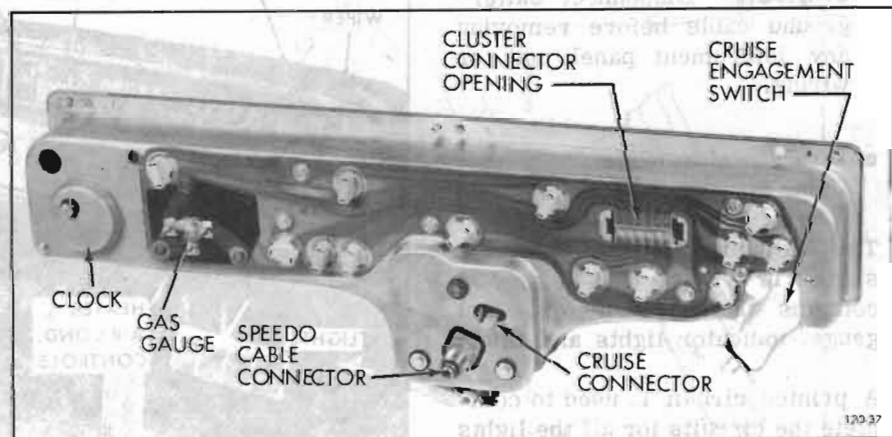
Back of Instrument Cluster Assembly - LeSabre, Wildcat and Electra
